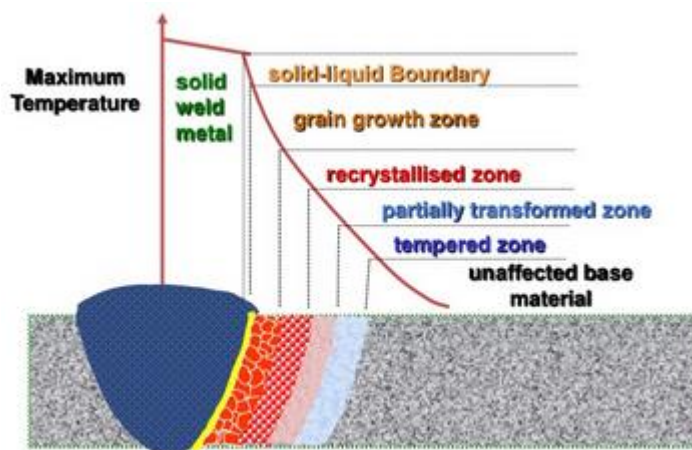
Heat affected zone after welding (Welding Inspection Cswip 2010)
